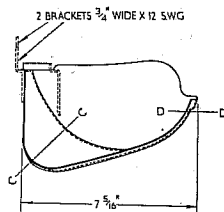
(left).—Dimensioned drawing of leg shield (22-gauge deep-drawing steel)
